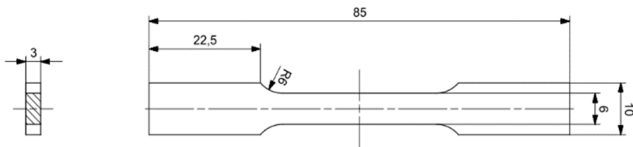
Technical drawing of a sample prepared for a static tensile test
